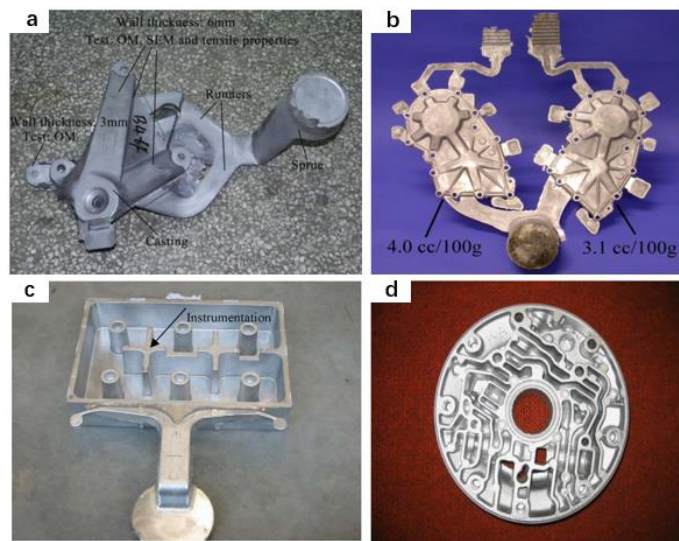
Aluminium castings produced by high pressure die casting: (a) casting of alloy Al11wt%Si2wt%Cu1wt%Fe with filling and overflow system [138] (b) twin cavity casting of alloy ADC12 [139] (c) the filter box of Al12wt%Si alloy [140] (d) the pump cover casting of alloy ADC12 (1700 g weight, 215 mm diameter) [139]
